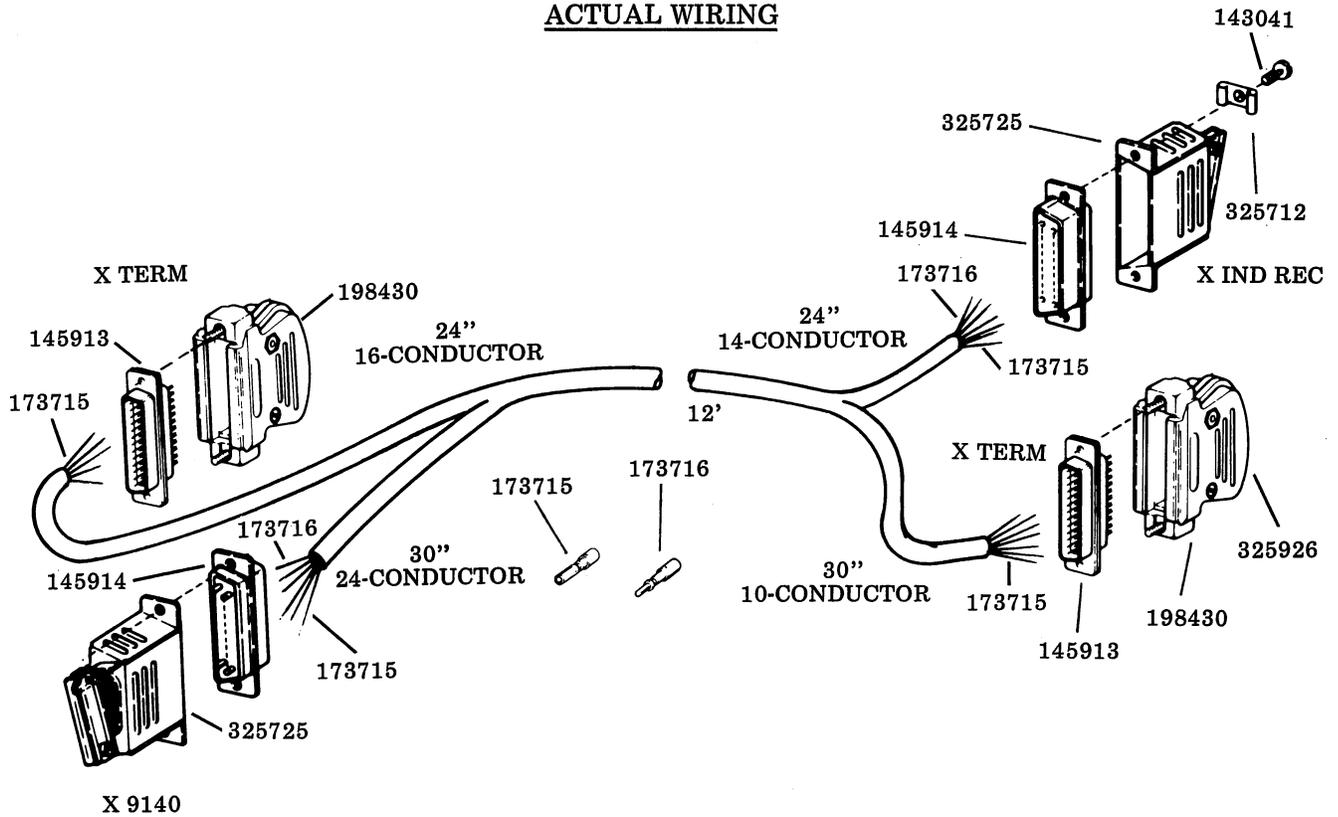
Individual Receiver Selection Cable Assembly
